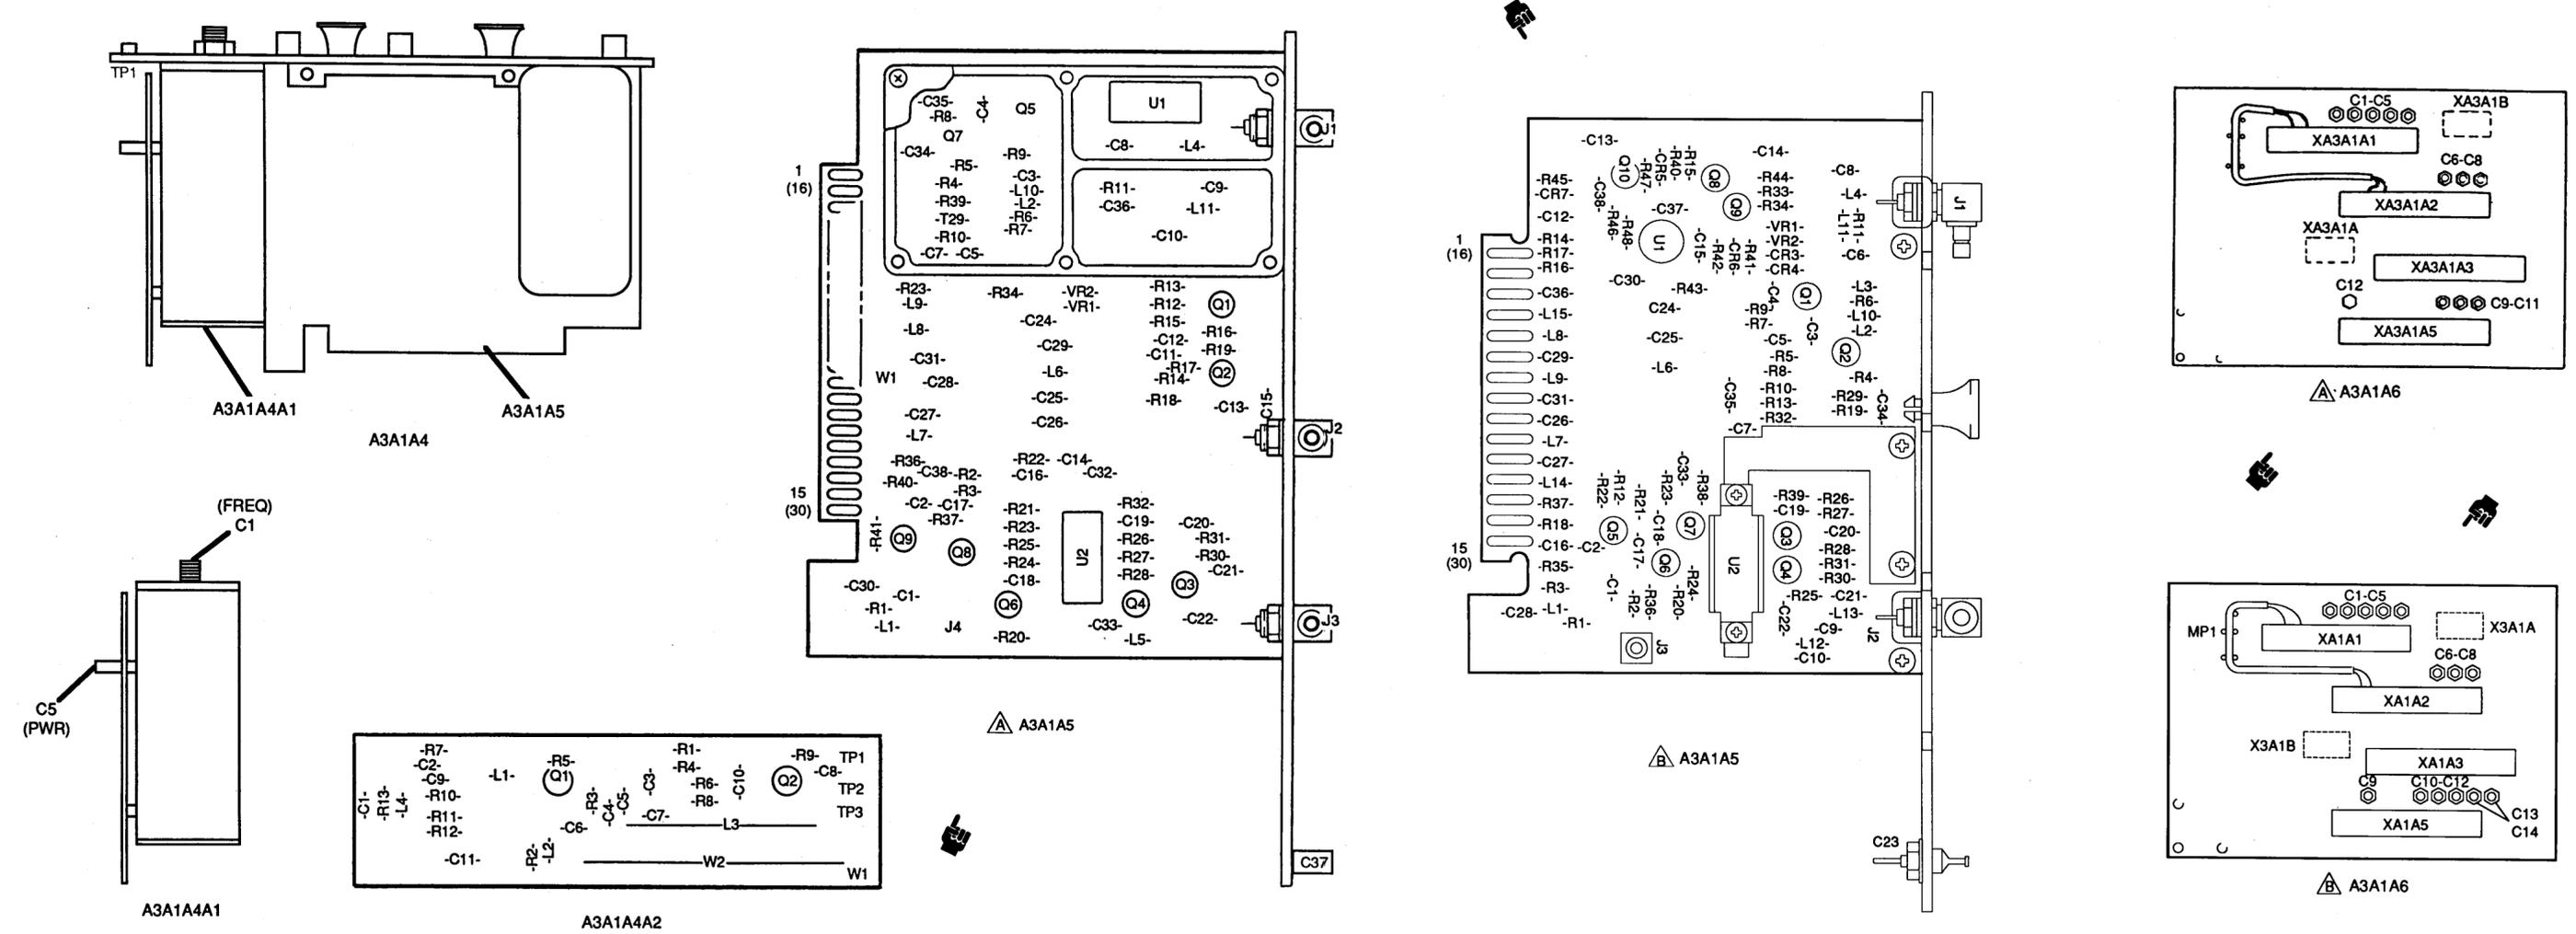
A3 Assembly Component Locator Diagram (Sheet 2 of 5).
